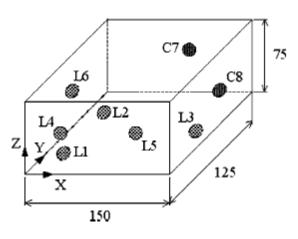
Scheme of 3-2-1 fixture setup [1].
